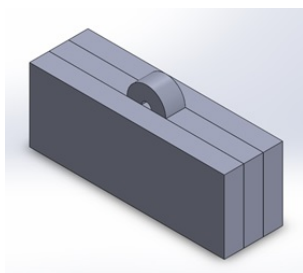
A CAD model of the assembly of the HLD controlling device
